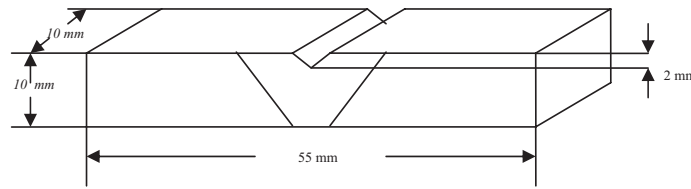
Impact test specimen ( Notch at Weld centre)
